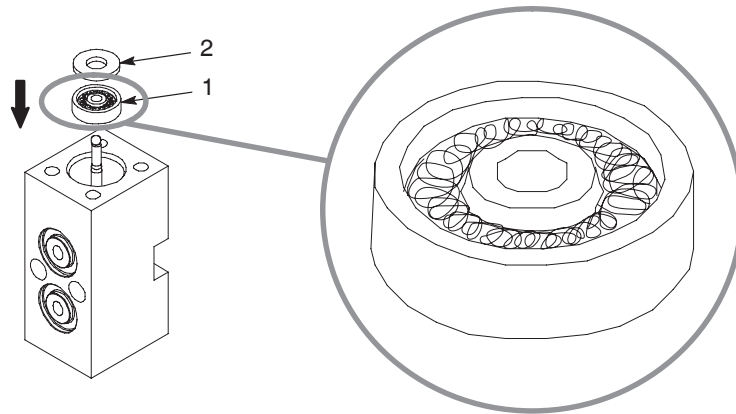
Inserting the spring seal, seal support disk, and compression spring
